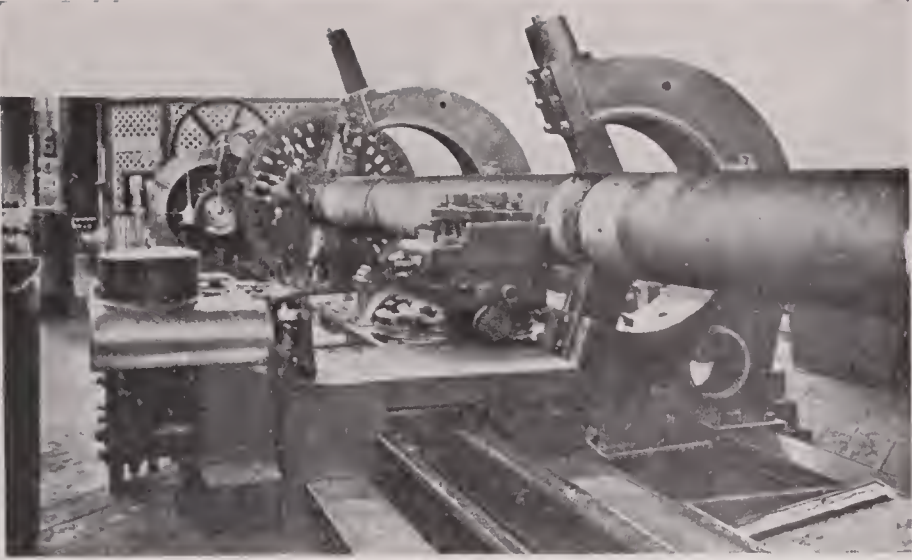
14-INCH TUBE IN LATHE FOR TURNING.
